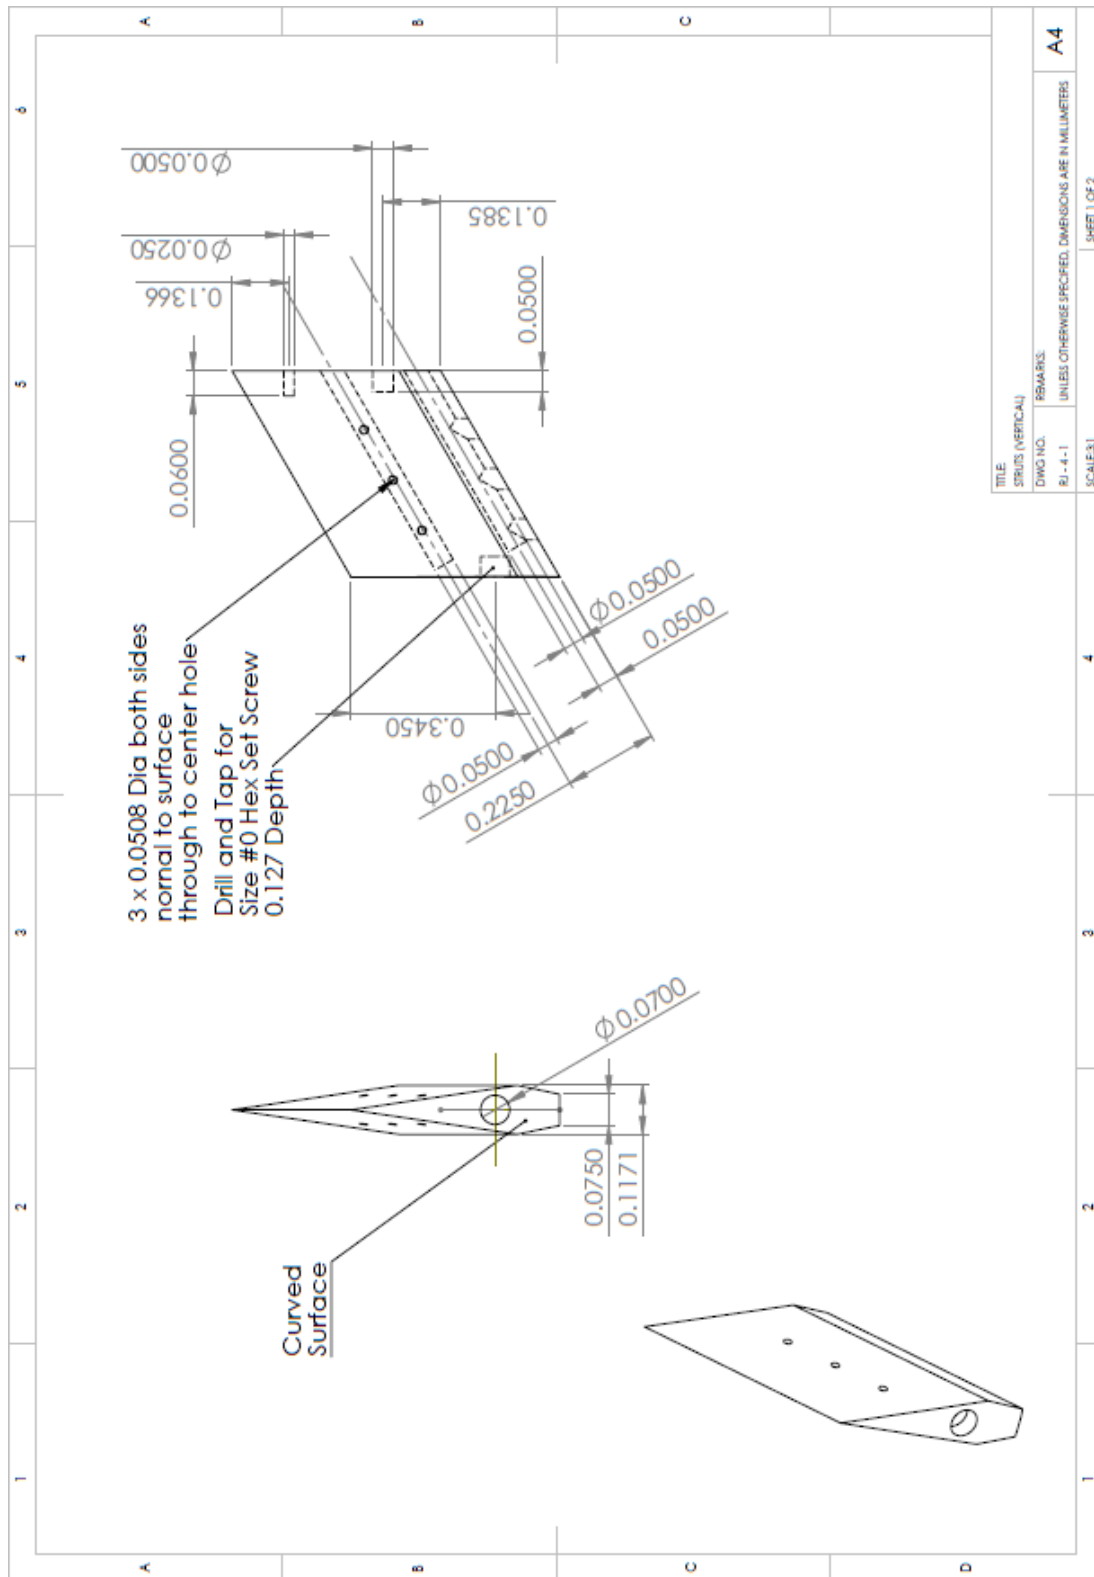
Part drawing: Ramjet vertical struts (RJ – 4 – 1)
